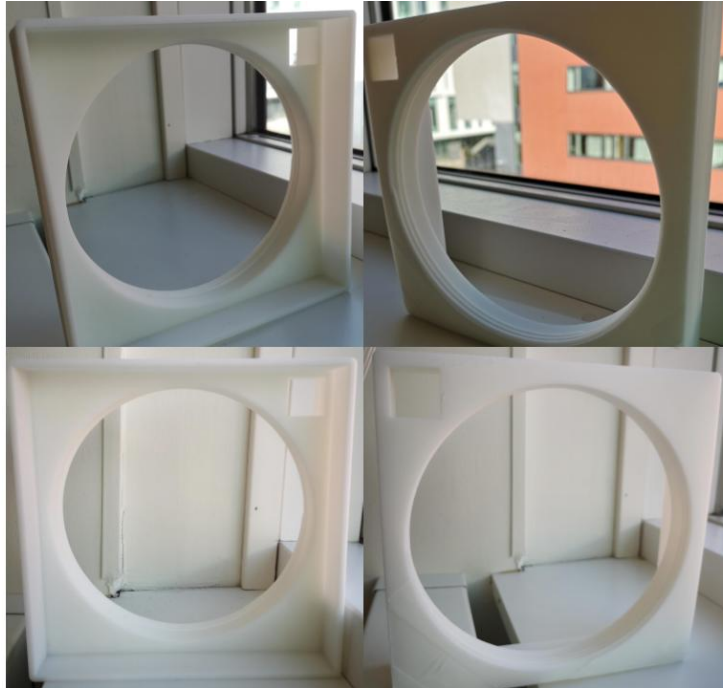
First 3D-printed prototype with screw threads, female part, A1.
